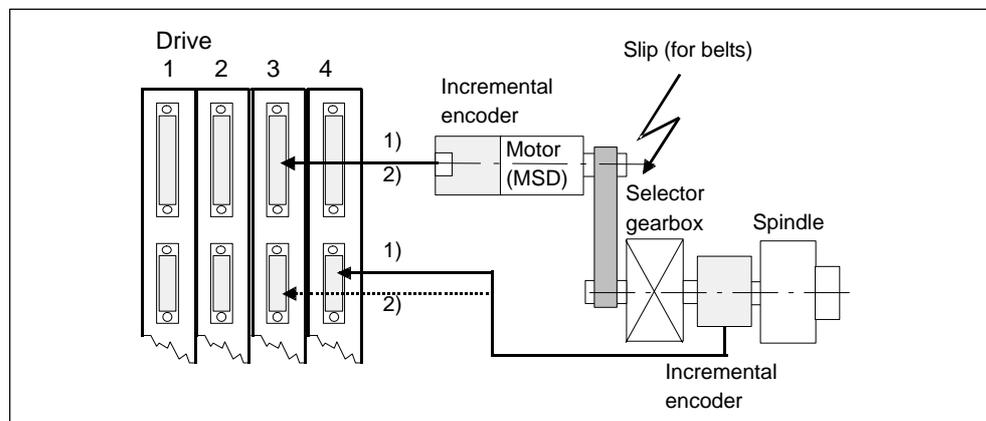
Configuration for a spindle with a drive subject to slip and 2 encoders
